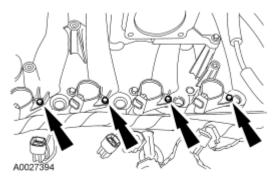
Ignition Coils & Bolts Courtesy of FORD MOTOR CO.
